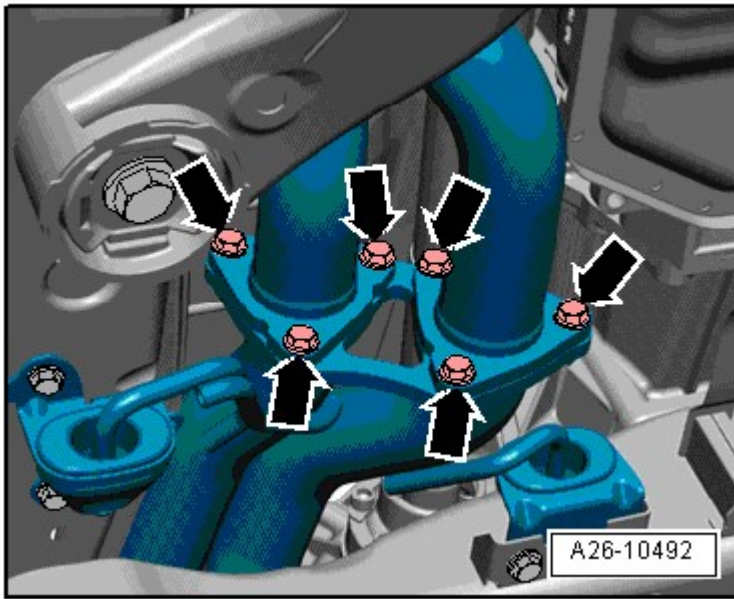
Identifying Bolts -Arrows-, Primary Catalytic Converter Pipes, And Clamping Sleeves
